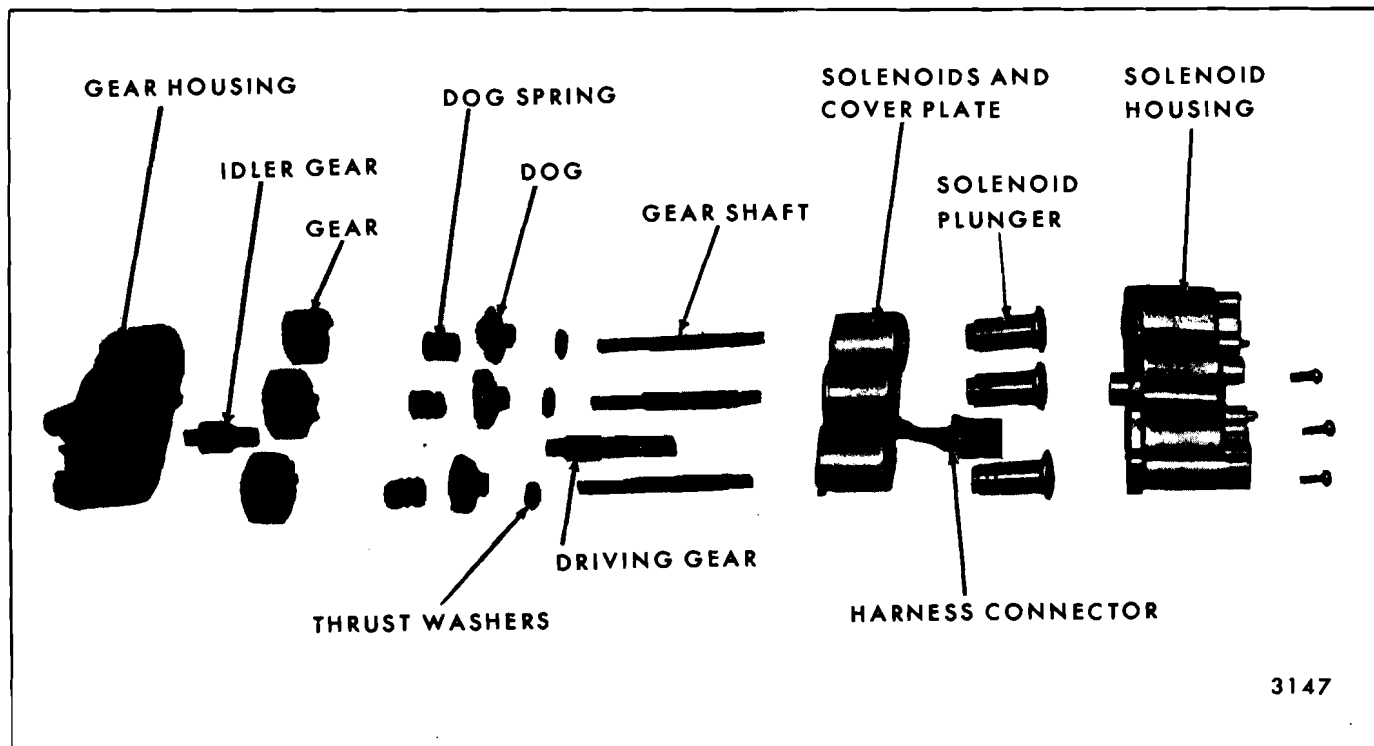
Six-Way Seat Adjuster Transmission - Disassembled - Buick, Oldsmobile and Cadillac 60-40 Seats
